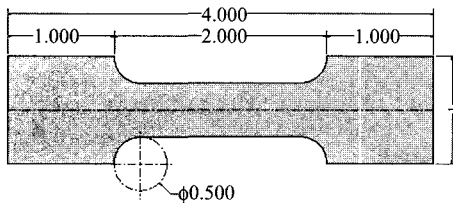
Dimension of a Nickel specimen for the micro tensile test. (unit : mm)
